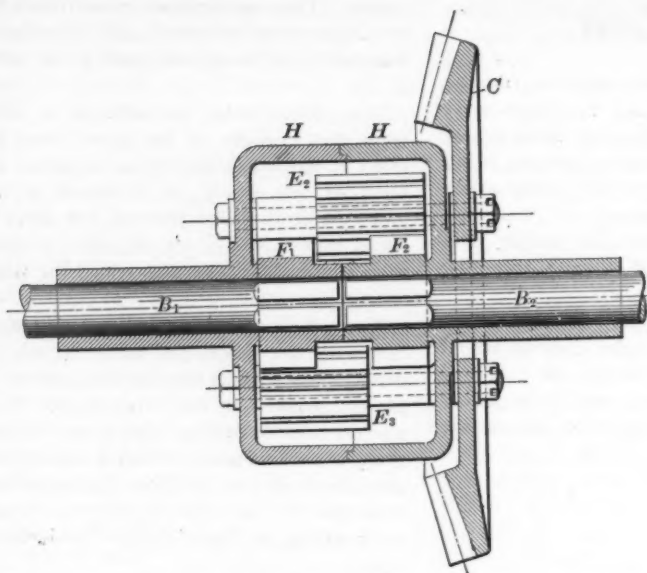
SECTION IN PLAN THROUGH SPUR GEAR DIFFERENTIAL CASING.
